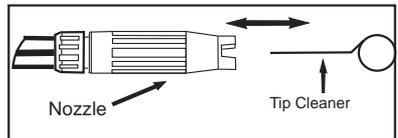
Insert tip cleaner in nozzle hole and move back and forth until debris is dislodged
